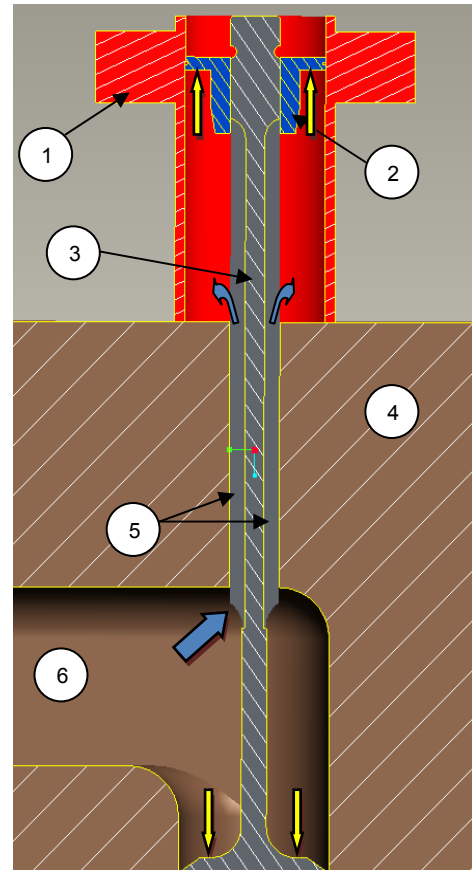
A simple cross section illustration of the pneumatic valve spring arrangement mounted on the cylinder head
